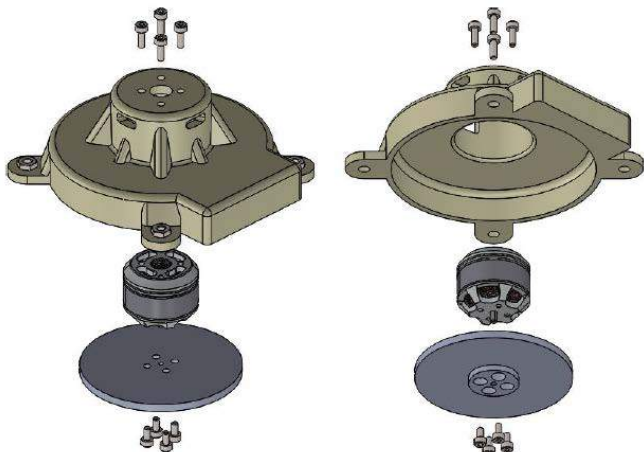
Detailed view of reaction wheel assembly (brushless motor, inertial mass and housing)
